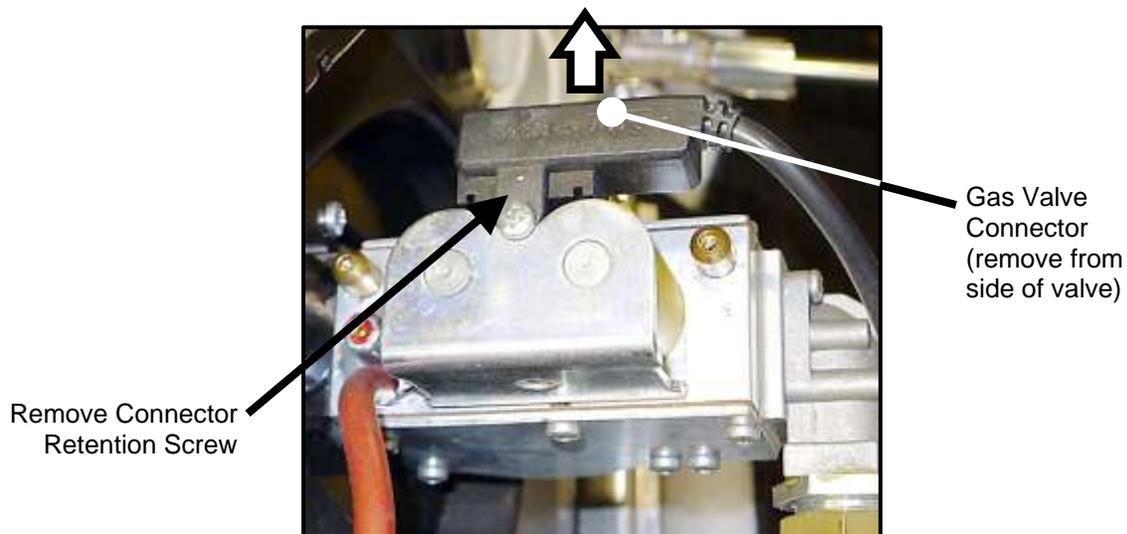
Removing Gas Valve Connector from All Gas Valves (Step 7)
